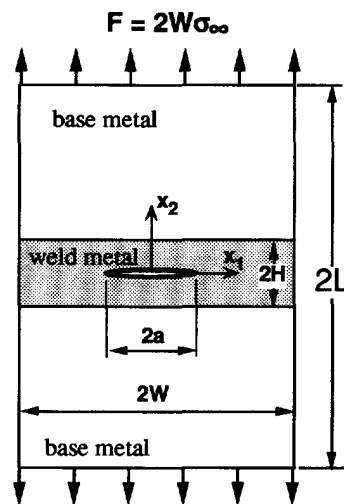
Configuration of a CCT panel with a central weld strip.
